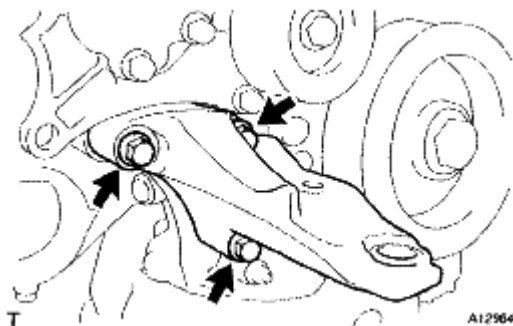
Removing Drive Shaft Bearing Bracket (For 2WD)
